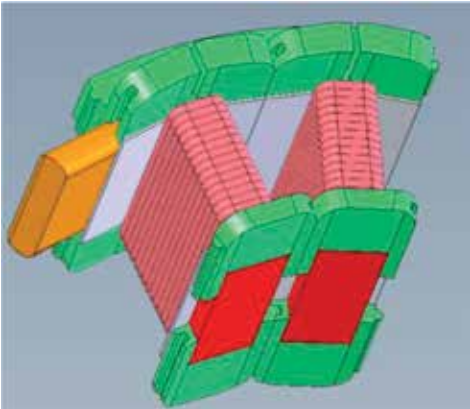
Assembly of the stator magnetic core made of AMM [8]
